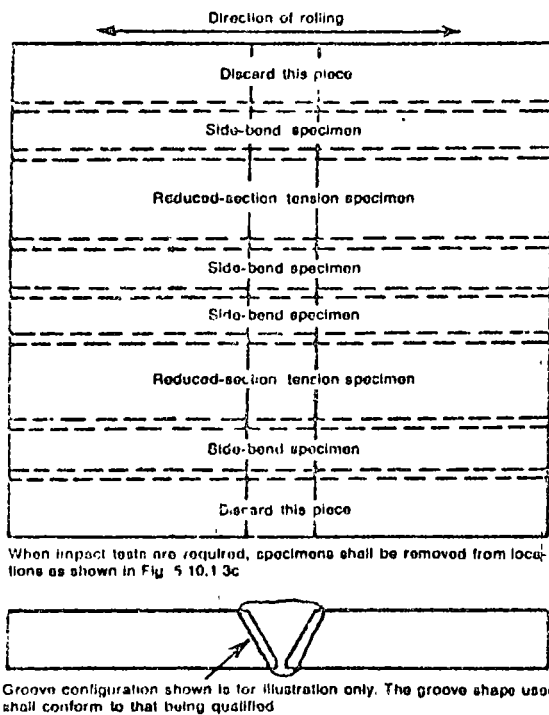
Location of test specimens on welded test plate over 3/4 in. thick—procedure qualification.
